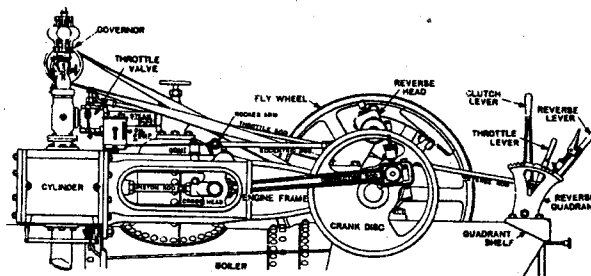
SIDE ELEVATION OF ENGINE PROPER
